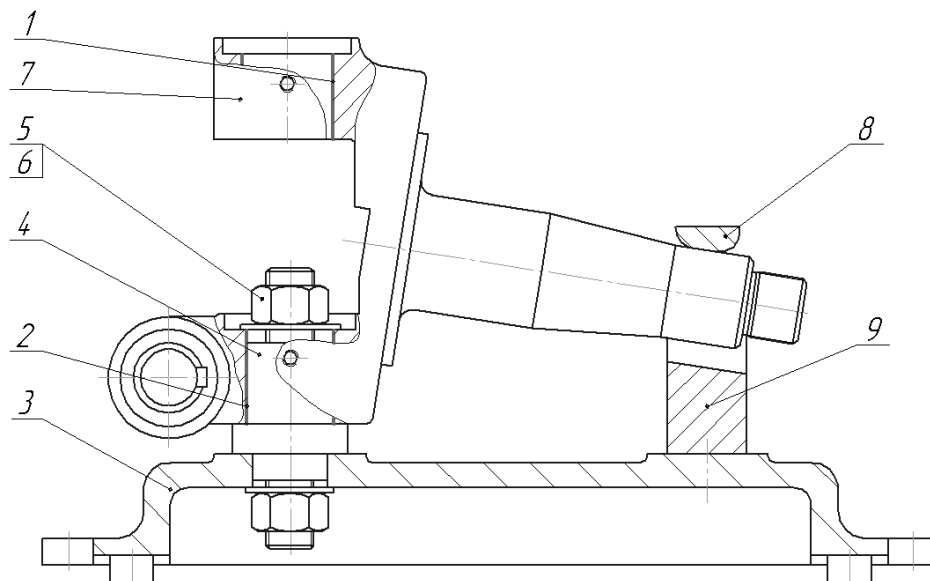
Technological attachments for pivot journal boring: 1,2 – holes being reconditioned; 3. plate of the fixture; 4. adjusting pin; 5. washer 6 nut; 7 pivot journal; 8. clamping plate; 9. supporting prism
